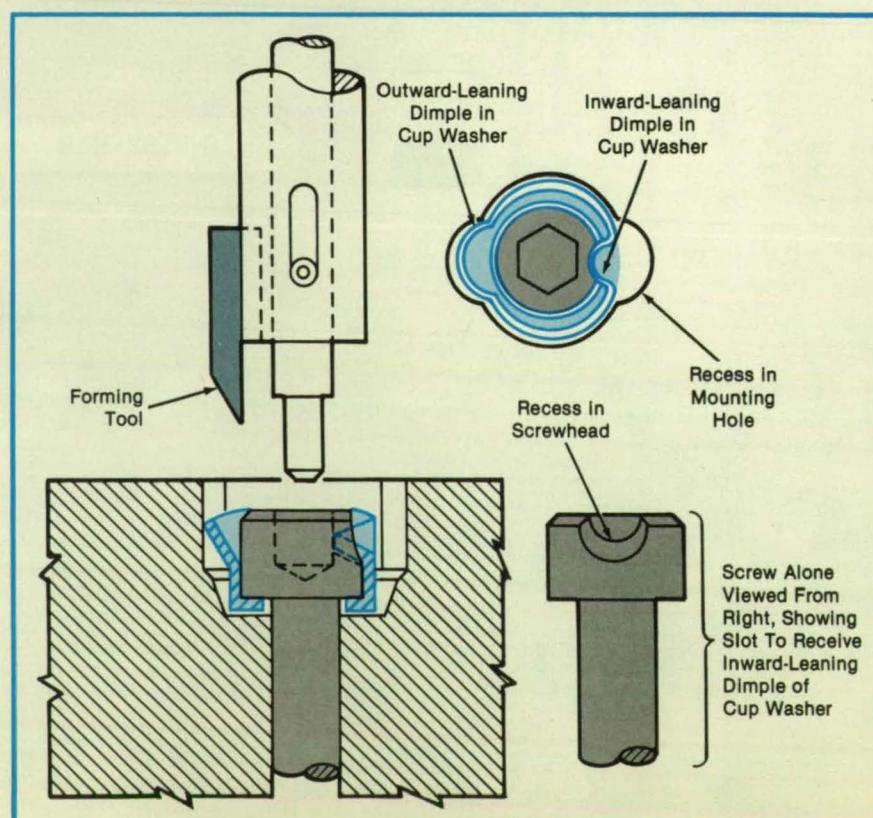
A Forming Tool would create another dimple in the cup washer, causing the washer to grip one of the recesses in the mounting hole. The screw would then be restrained against turning.
